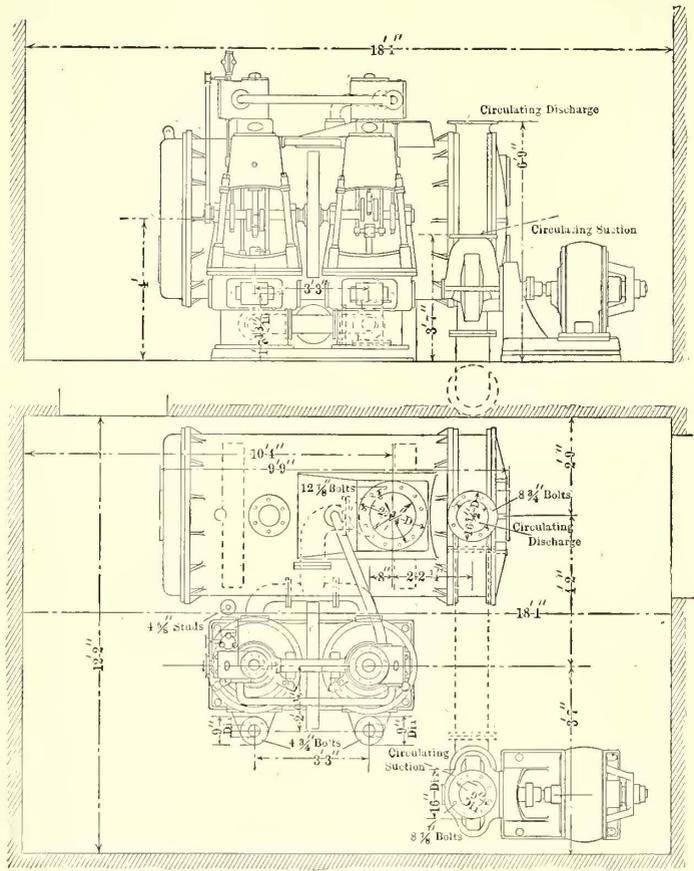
PLAN AND END ELEVATION OF CONDENSER PUMPS
